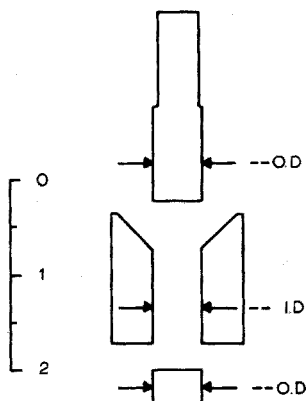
Cross-section of cylindrical die for making 0.5-in diameter ion-exchange resin pellets. Parts are made of type 440 C stainless steel hardened to Rockwell C 62. Die body was honed and piston faces are polished with 1 μ m diamond paste. I.d. of cylinder = o.d. pistons + 0.0005 in.
